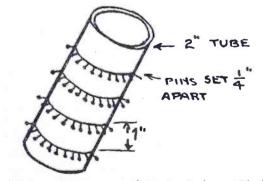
Appearance of Tube Before Winding Honeycomb Coil.
